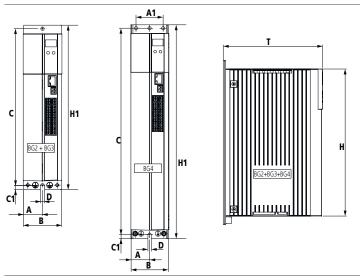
Dimensions (in mm) BG2, BG3, BG4
